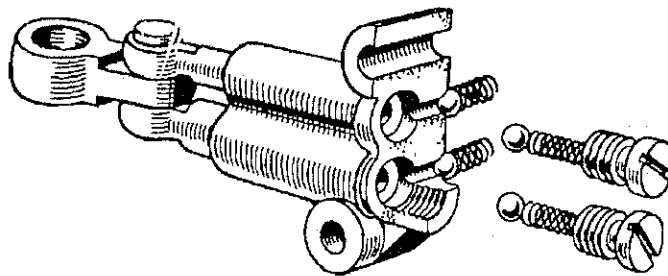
Oil Pump showing Auxiliary Ball Valves.
